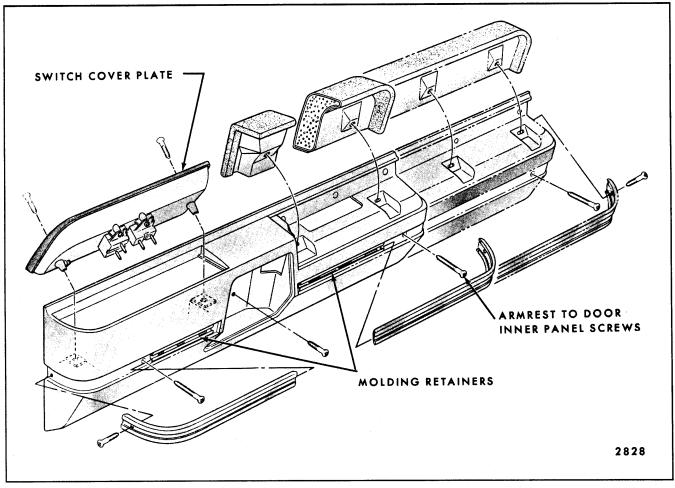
Door Arm Rest Build-Up and Attachments - Buick and Oldsmobile Styles
